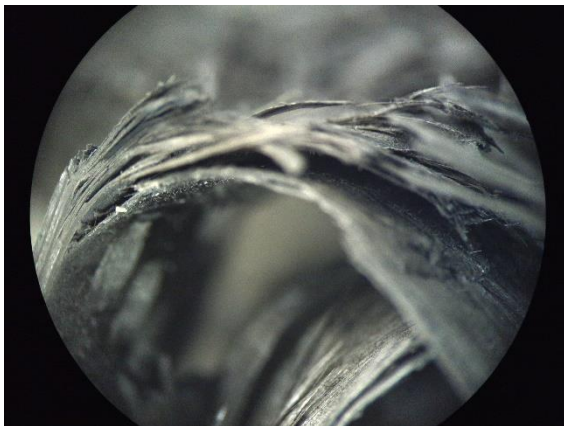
3 deg. loaded specimen. Peripheral section.
